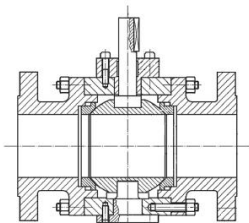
Three-piece Trunnion Mounted Ball Valve
